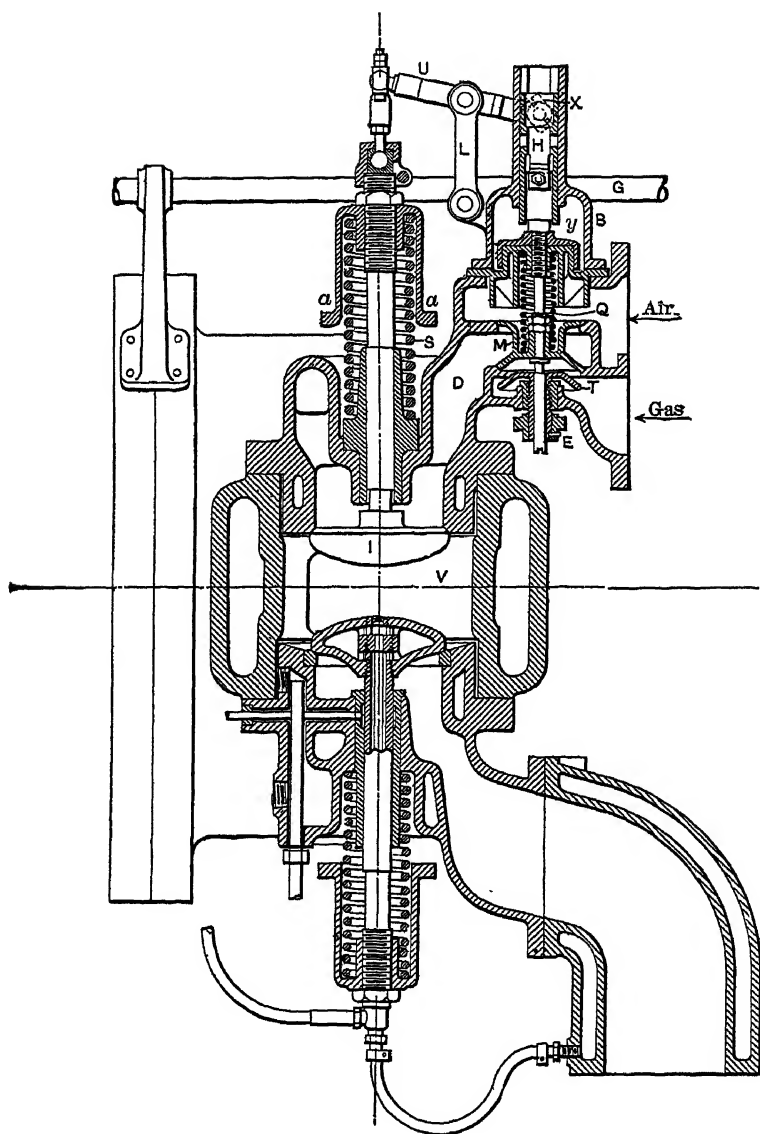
The "Snow" Standard Valve Gear. Longitudinal Section.
